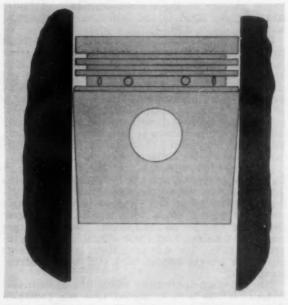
A piston fitting a cylinder in this manner presents an impossible run-in problem.
